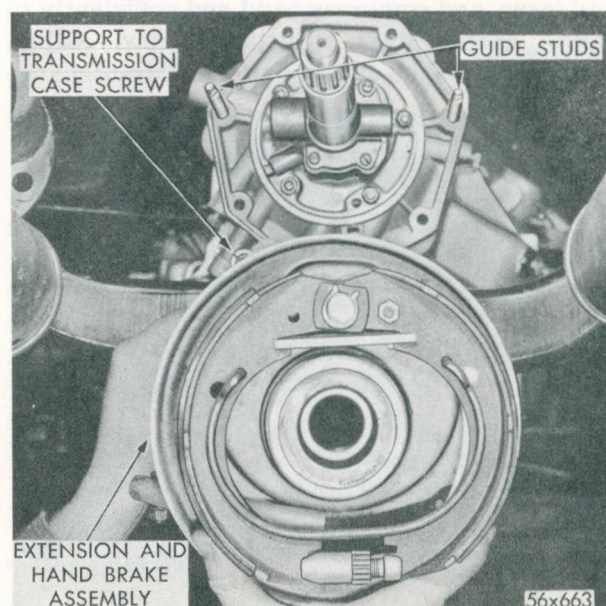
Removal and Installation of Extension and Handbrake Assembly
